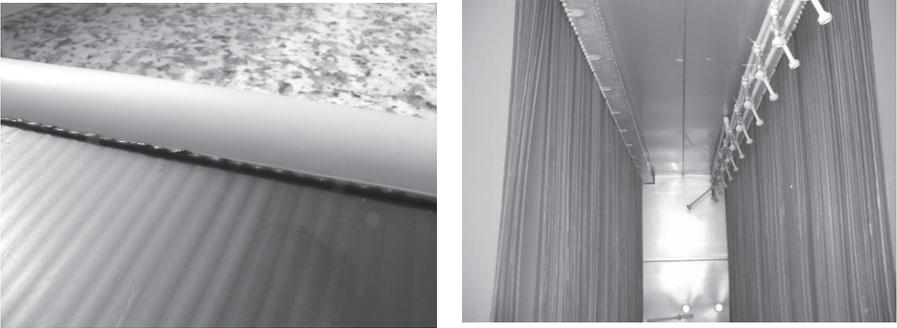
Newly developed plastic welding method ensures high performing condenser plates made from polypropylene material.
